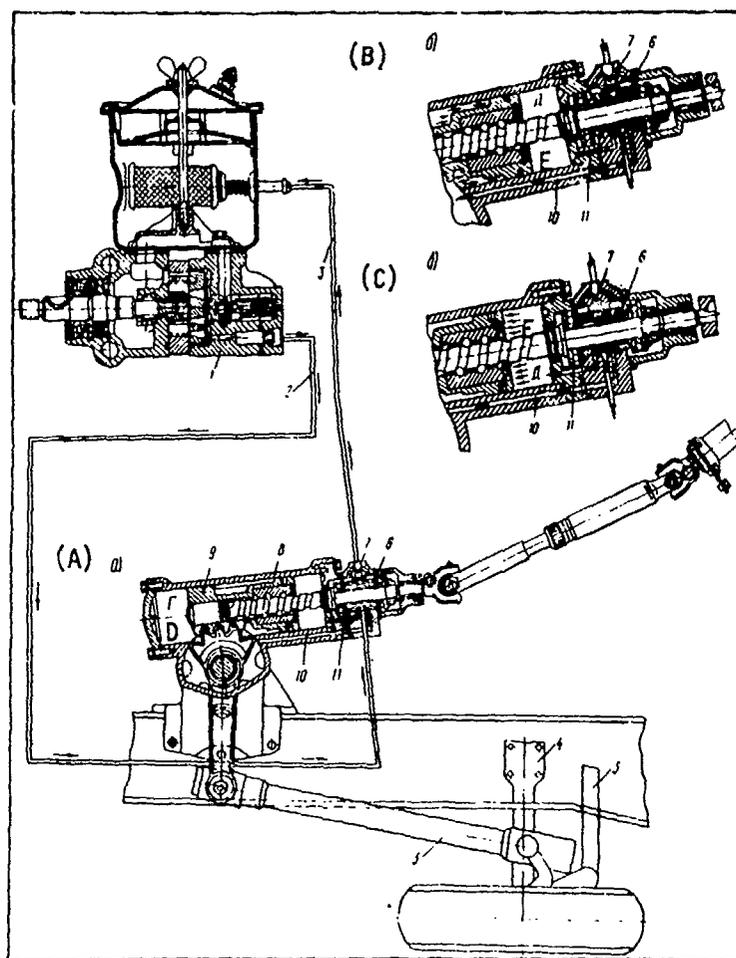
Operating scheme of a steering control with power booster -- position of the steering mechanism and the slide valve when the vehicle is moving: (A) straight ahead; (B) left turn; (C) right turn. (D) -- exterior chamber of the steering mechanism housing; (E) -- interior chamber of the steering mechanism housing; 1 -- pump; 2 -- high pressure hose; 3 -- low pressure hose; 4 -- front axle beam; 5 -- steering rods; 6 -- slide valve; 7 -- return valve; 8 -- steering mechanism housing; 9 -- piston-rod; 10 -- exterior chamber oil supply line; 11 -- interior chamber oil supply line; 12 -- steering wheel
